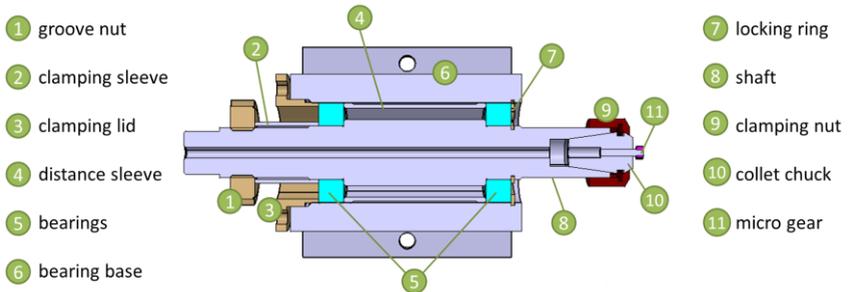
Bearings, shaft and gear fixing concept in the measurement setup
